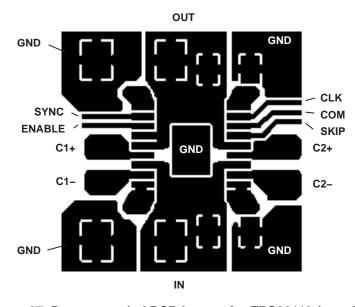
Recommended PCB Layout for TPS60110 (top view)
